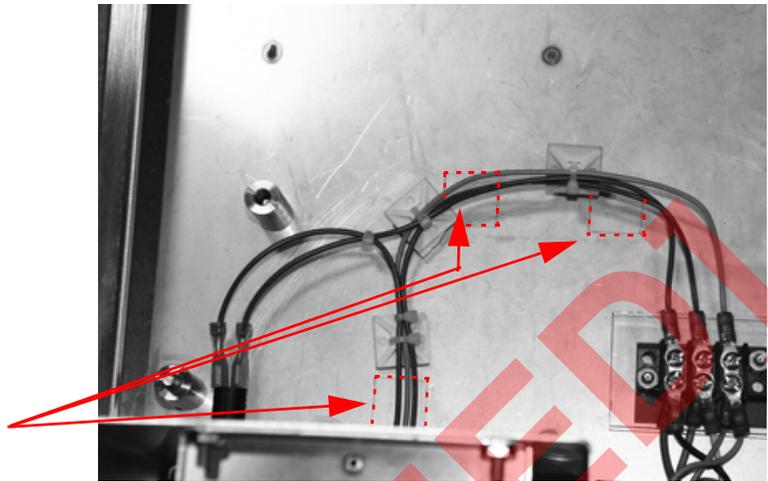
Secure Square Adhesive Cable Ties to SST3 Enclosure Bottom
